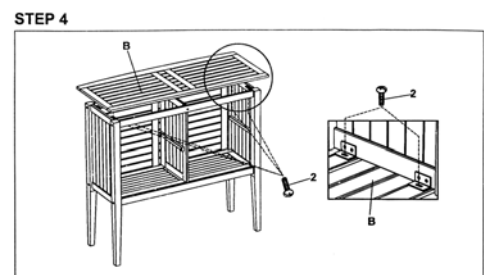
Assembly drawing from the Kona Outdoor Bar.
